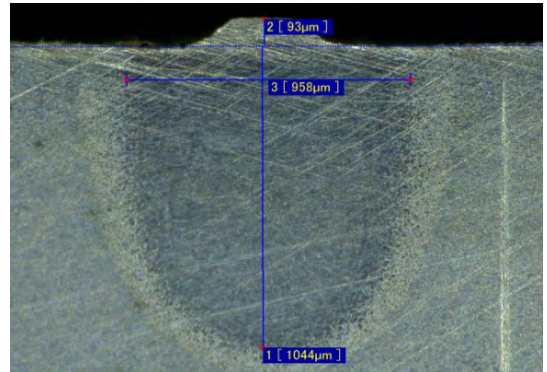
Picture of blind weld with 1 mm defocus
